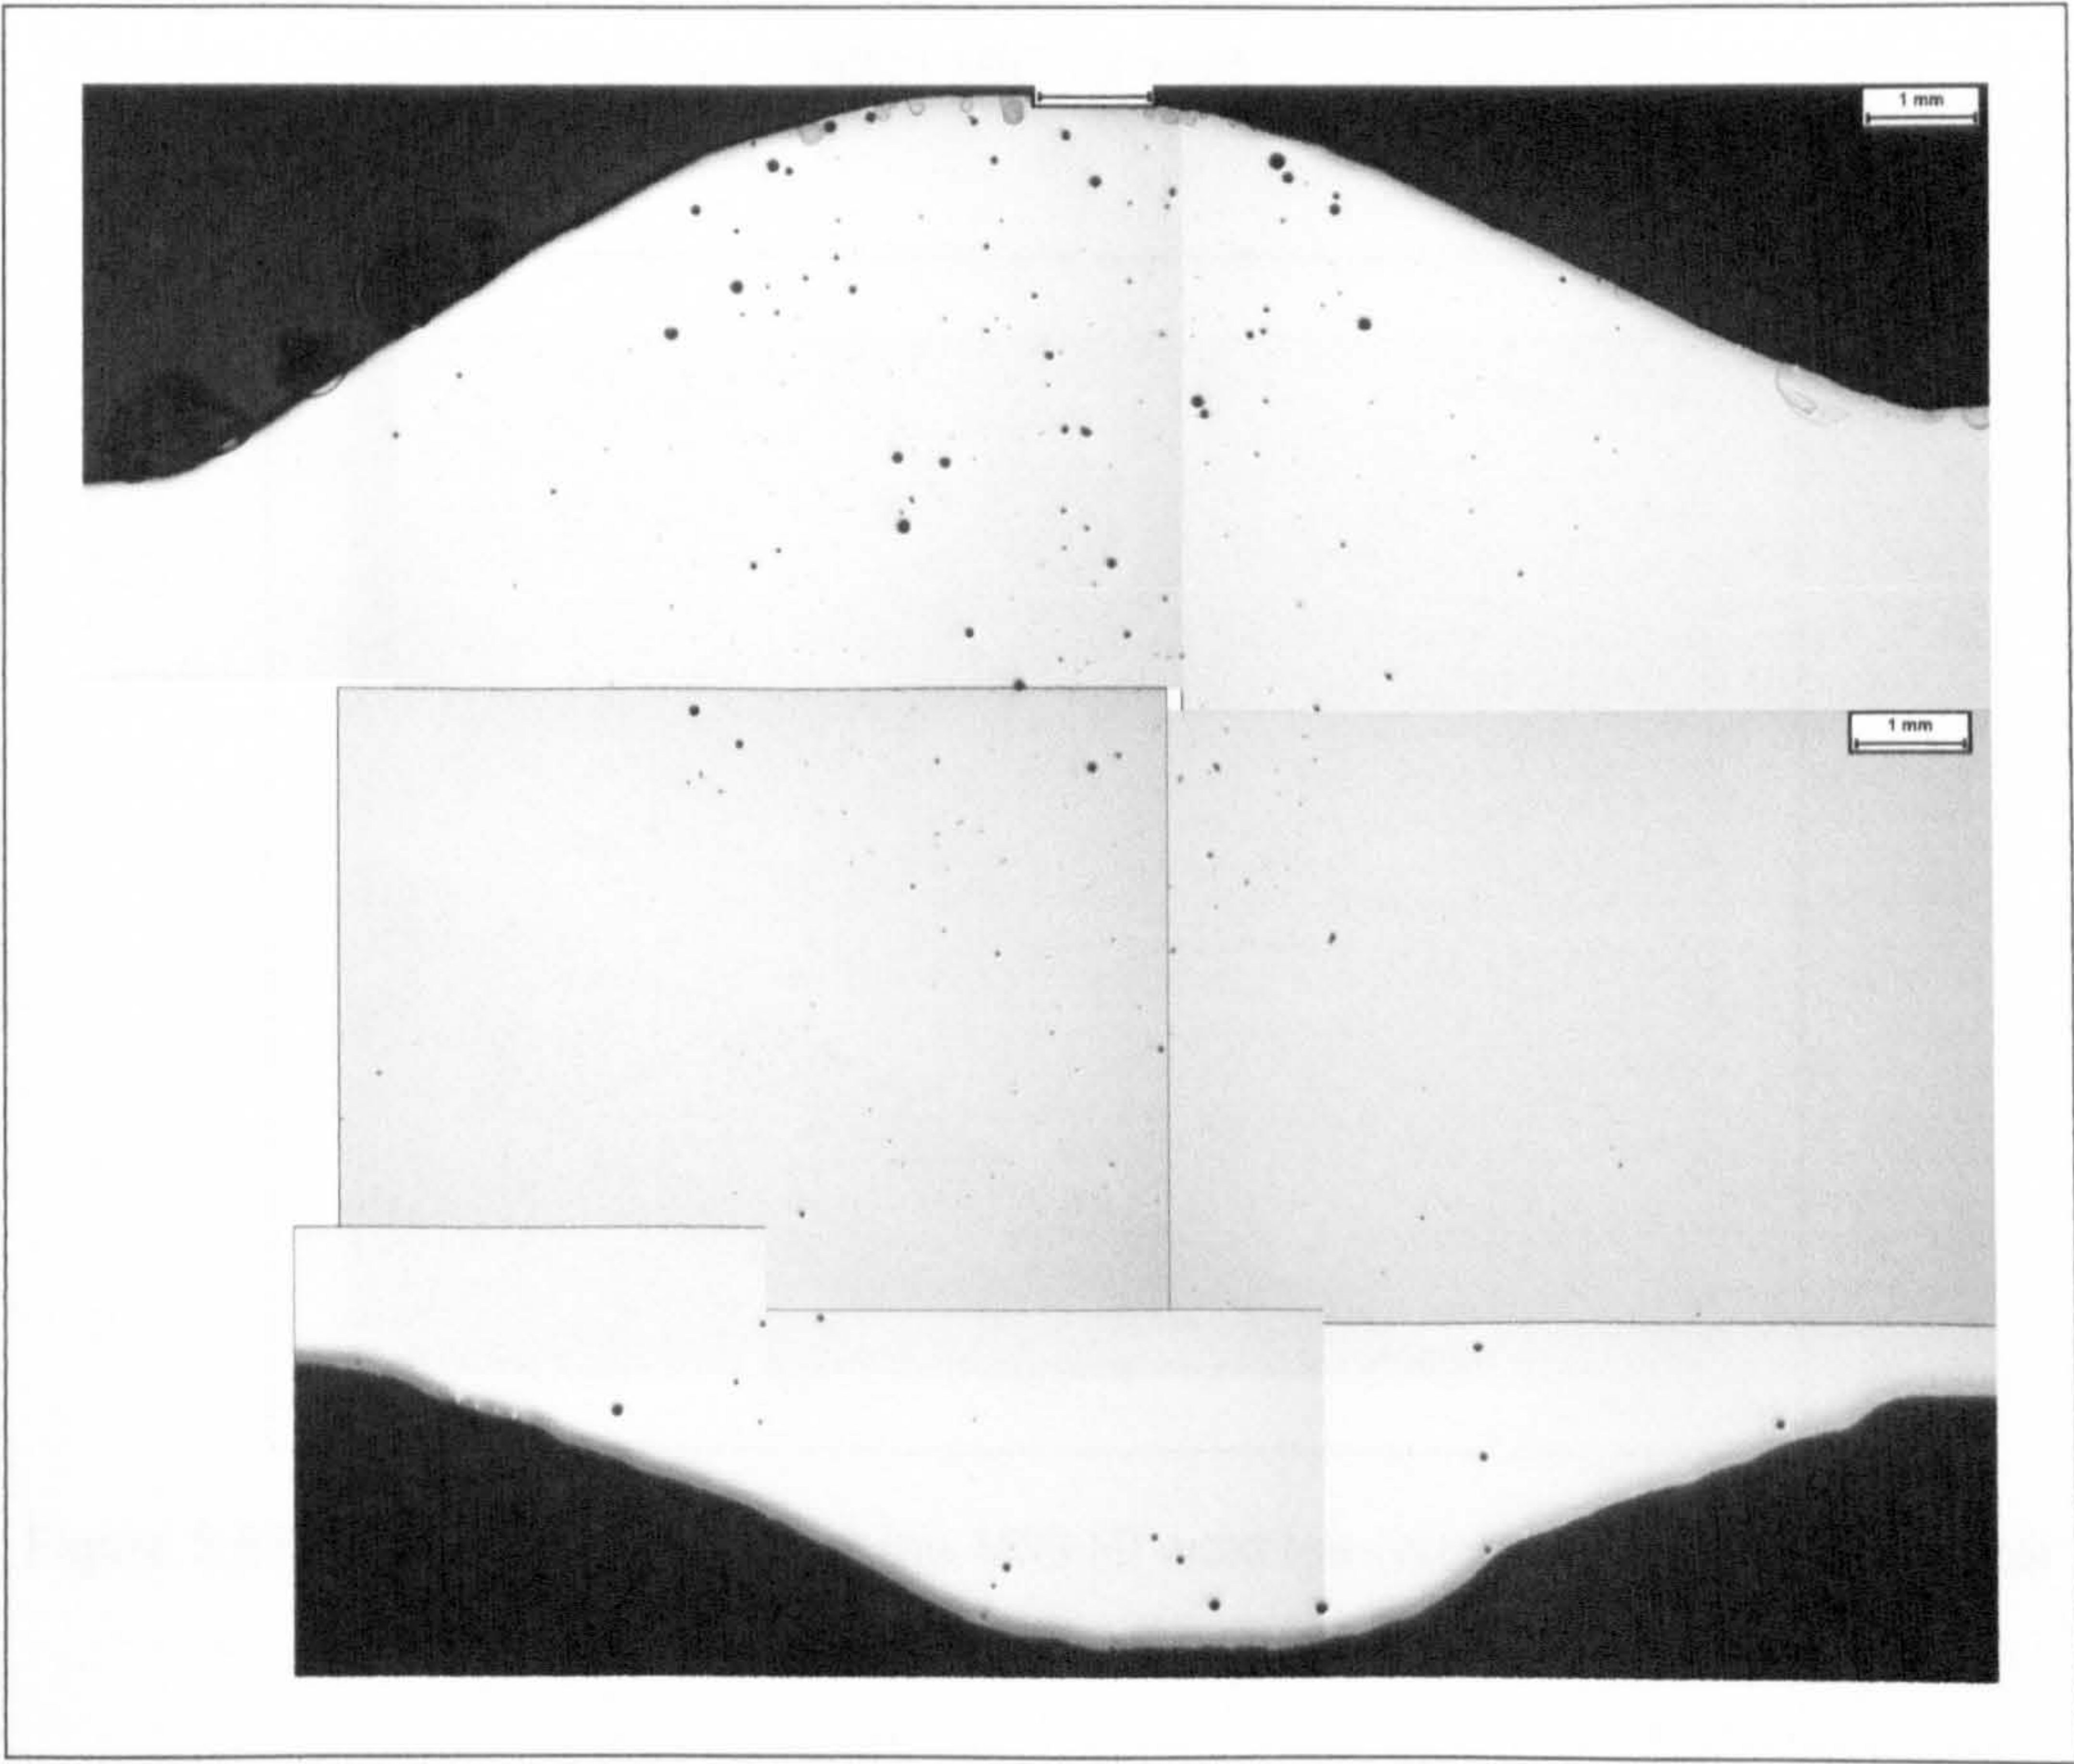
Weld porosity in MIG HI weld, second pass uppermost.
